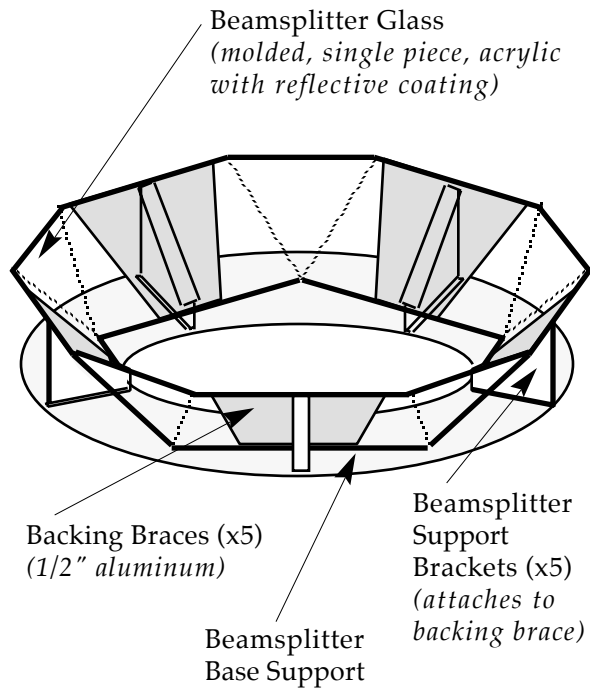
Beamsplitter assembly with formed beamsplitter glass and support structure.
